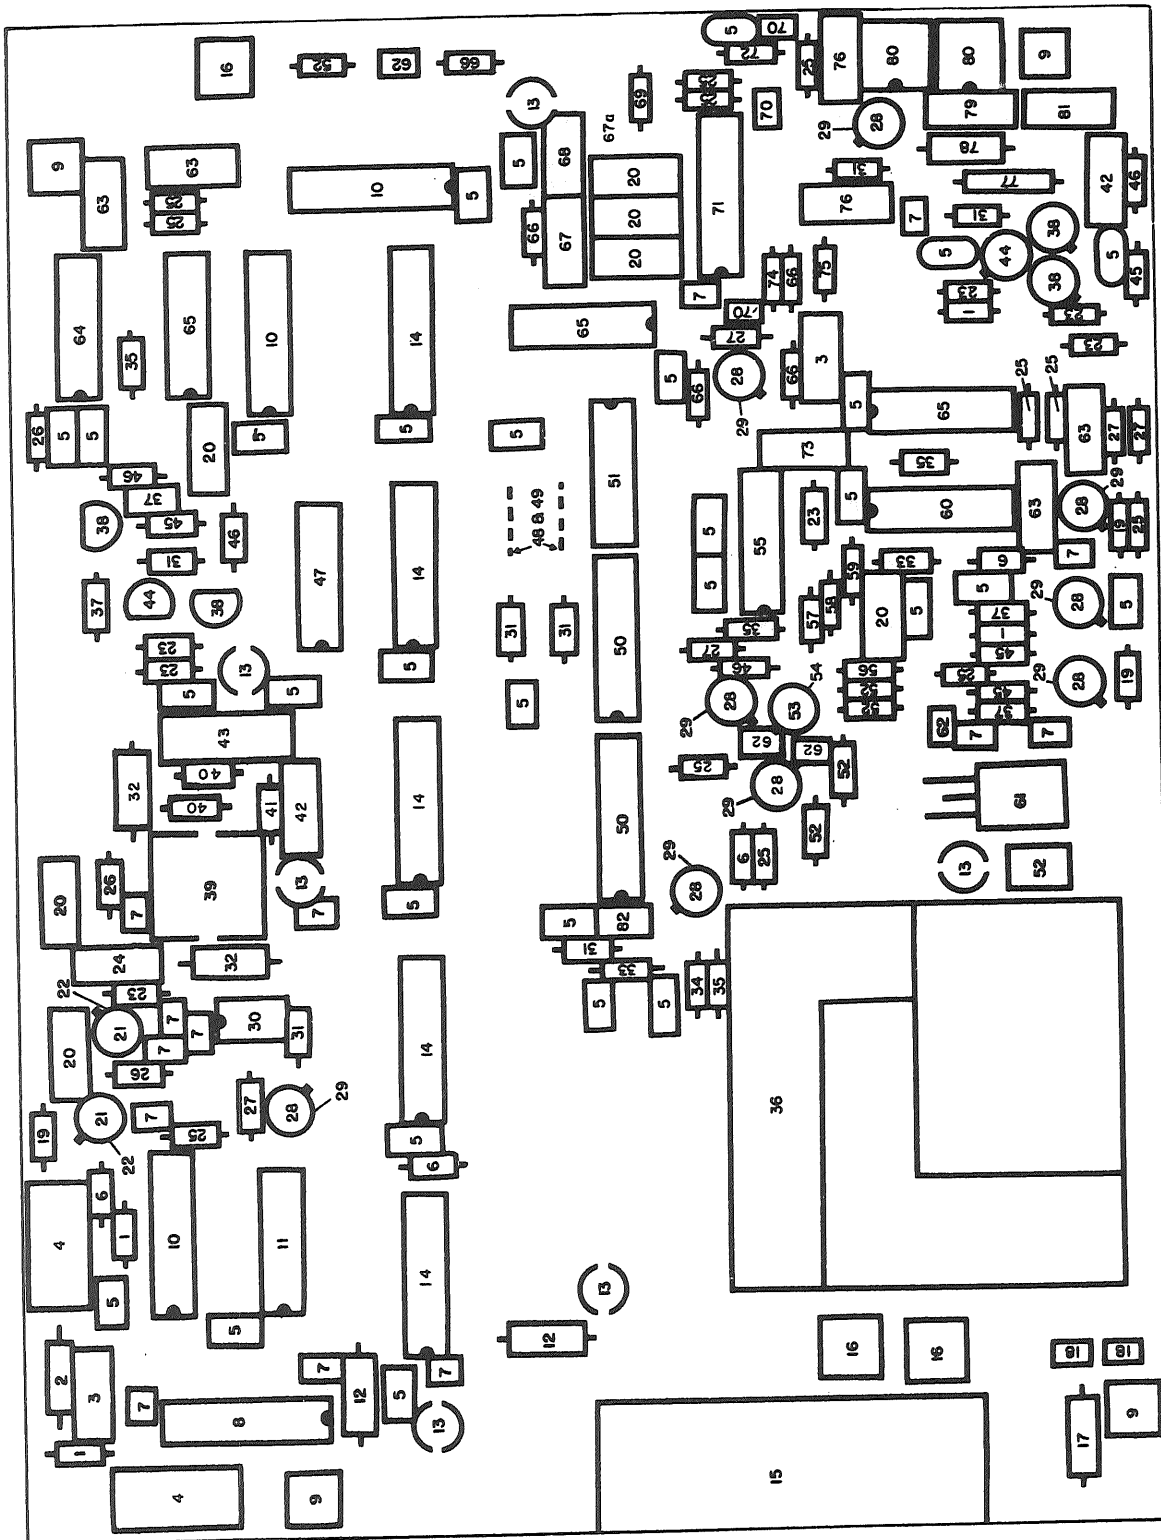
Second L.O./BFO Synthesizer Assembly, Circuit Card, A8
